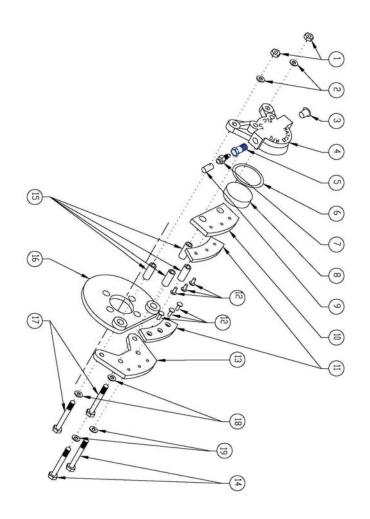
5 INCH SERIES WHLB5-D DUAL CALIPER ASSEMBLY 1.50"
